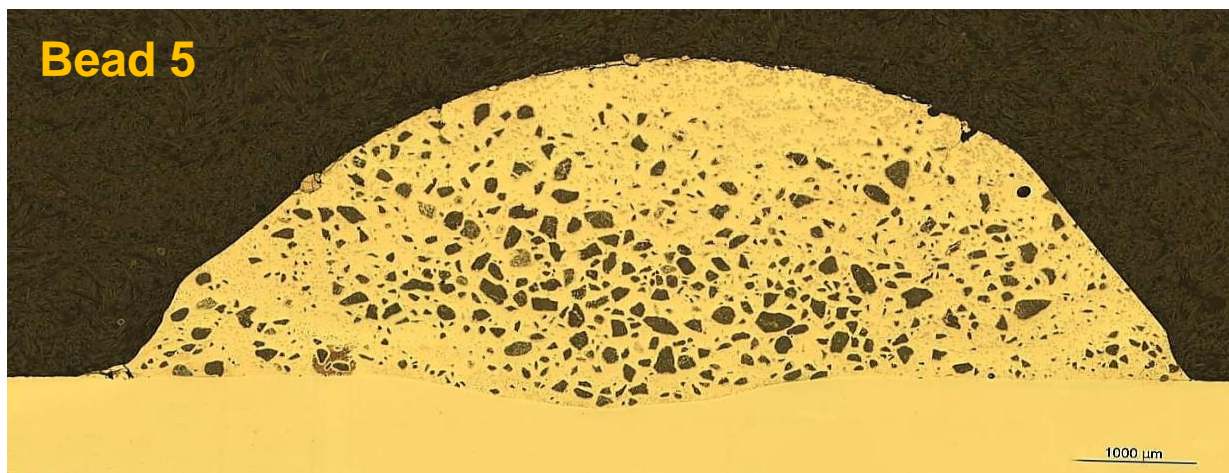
Torch perpendicular to the workpiece. Etched with Murakami.
